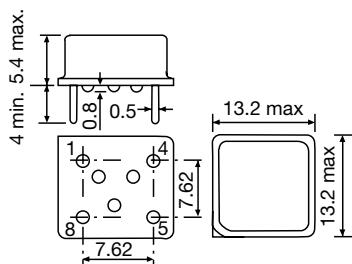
ECS-2200 Series – Side, Bottom and Top views
